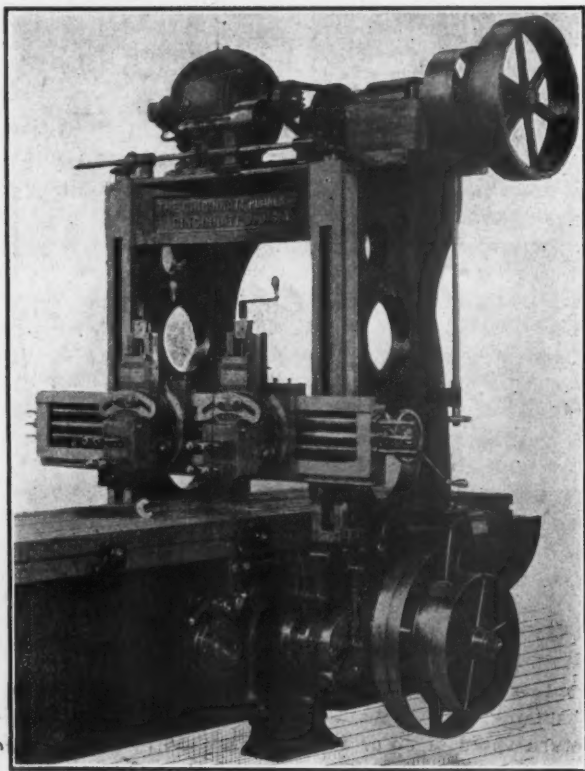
A SPECIAL DESIGN OF FLYWHEEL DRIVE UPON A PLANER, WITH MECHANICAL VARIABLE-SPEED DEVICE; BUILT BY THE CINCINNATI PLANER COMPANY.—NORTHERN ELECTRIC MOTOR.
